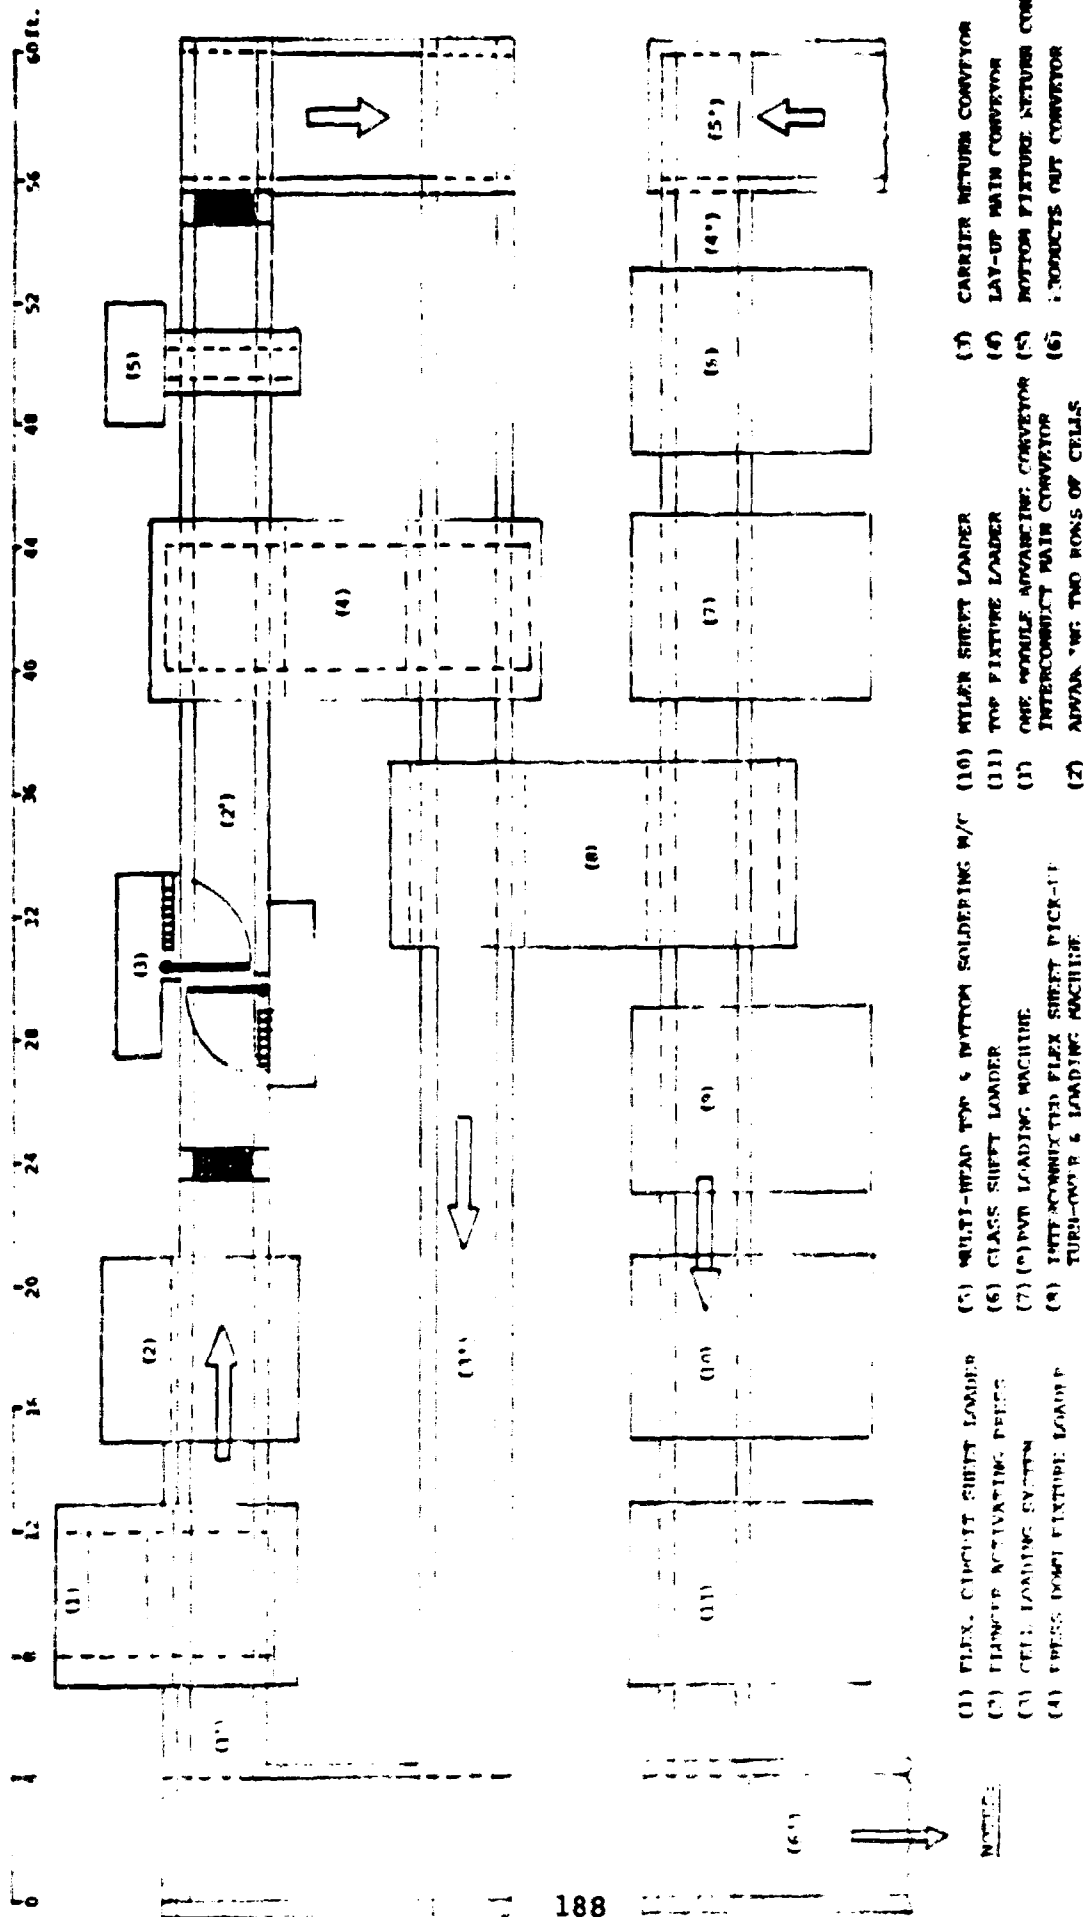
Layout of Module Fabrication Line 1 Interconnection and Lay-up Stations (60 modules/hr.).
